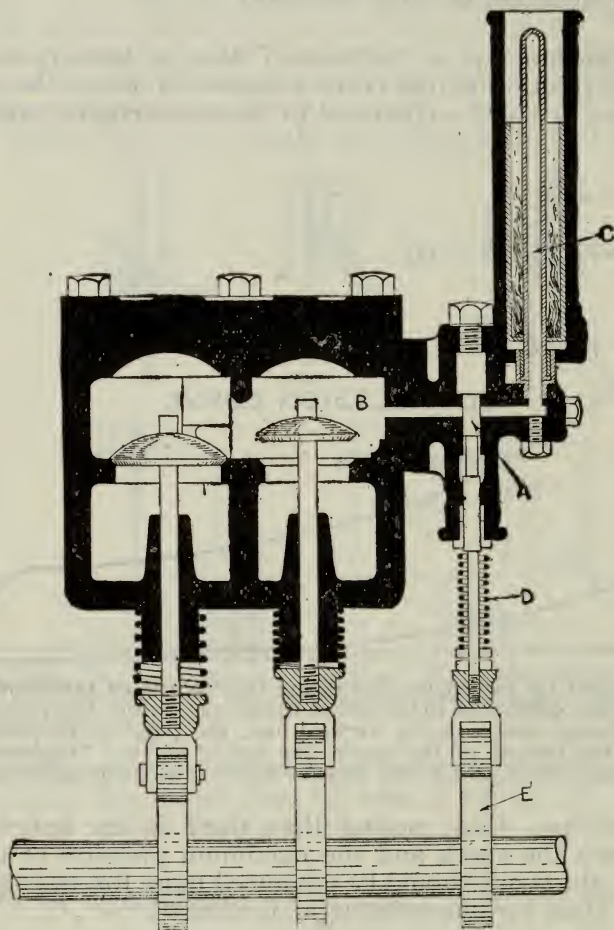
,904.—Sectional view through valves of engine showing hot tube method of ignition. This is a modification of the method described in the accompanying text and is more exact and satisfactory. *In construction*, a valve A, commonly called the timing valve, is provided, and which is interposed between the admission valve chamber B (communicating with the clearance space of the cylinder) and the interior of the hot tube C. This valve is normally held closed by the spring D. When the piston reaches its inner dead point at the end of the compression stroke, a cam E, on the secondary shaft, opens the valve and allows a portion of the compressed charge to pass into the hot tube where it ignites. The timing valve is held open throughout the power and exhaust strokes, thus permitting the products of combustion to be carried out of the tube with the exhaust.
